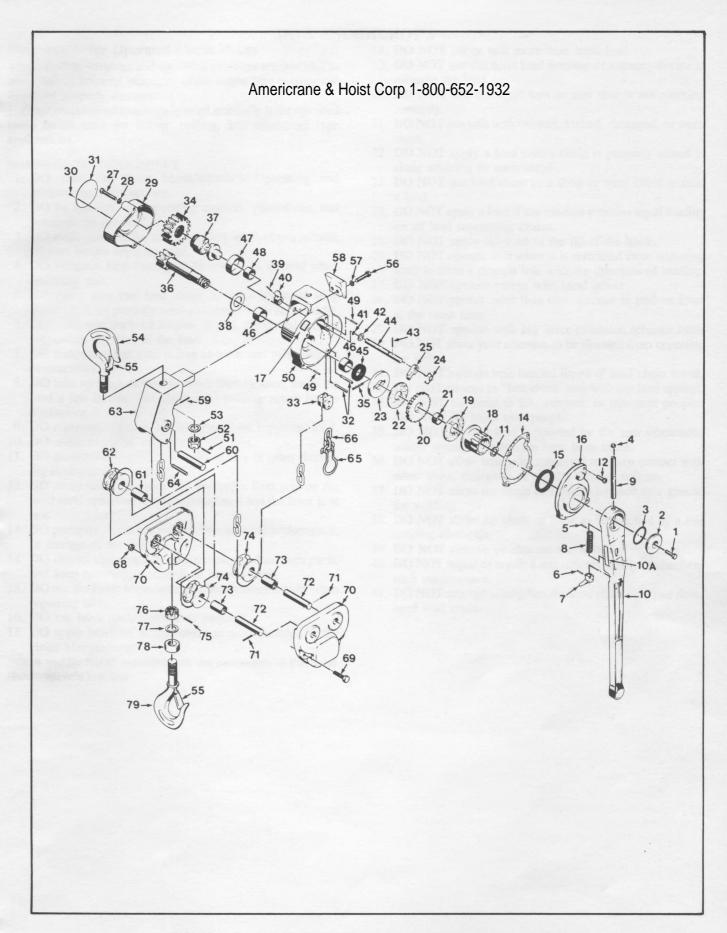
EXPLODED ILLUSTRATION OF MODEL MA-30-4 HOIST
